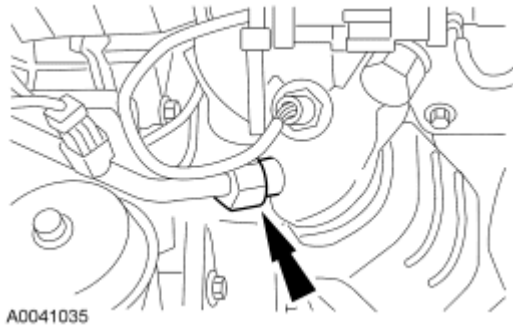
Locating EGR Tube-To-RH Catalytic Converter Fitting
